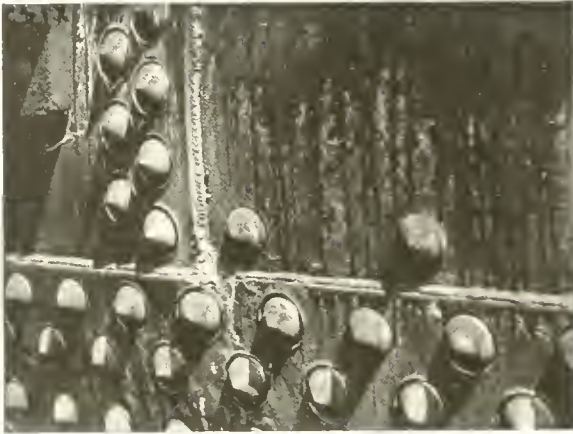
Welding in place of edging on crude oil stills made by The Standard Oil Co., where Lincoln Arc Welders are extensively used for boiler plate construction. Such construction has stood years of service.
